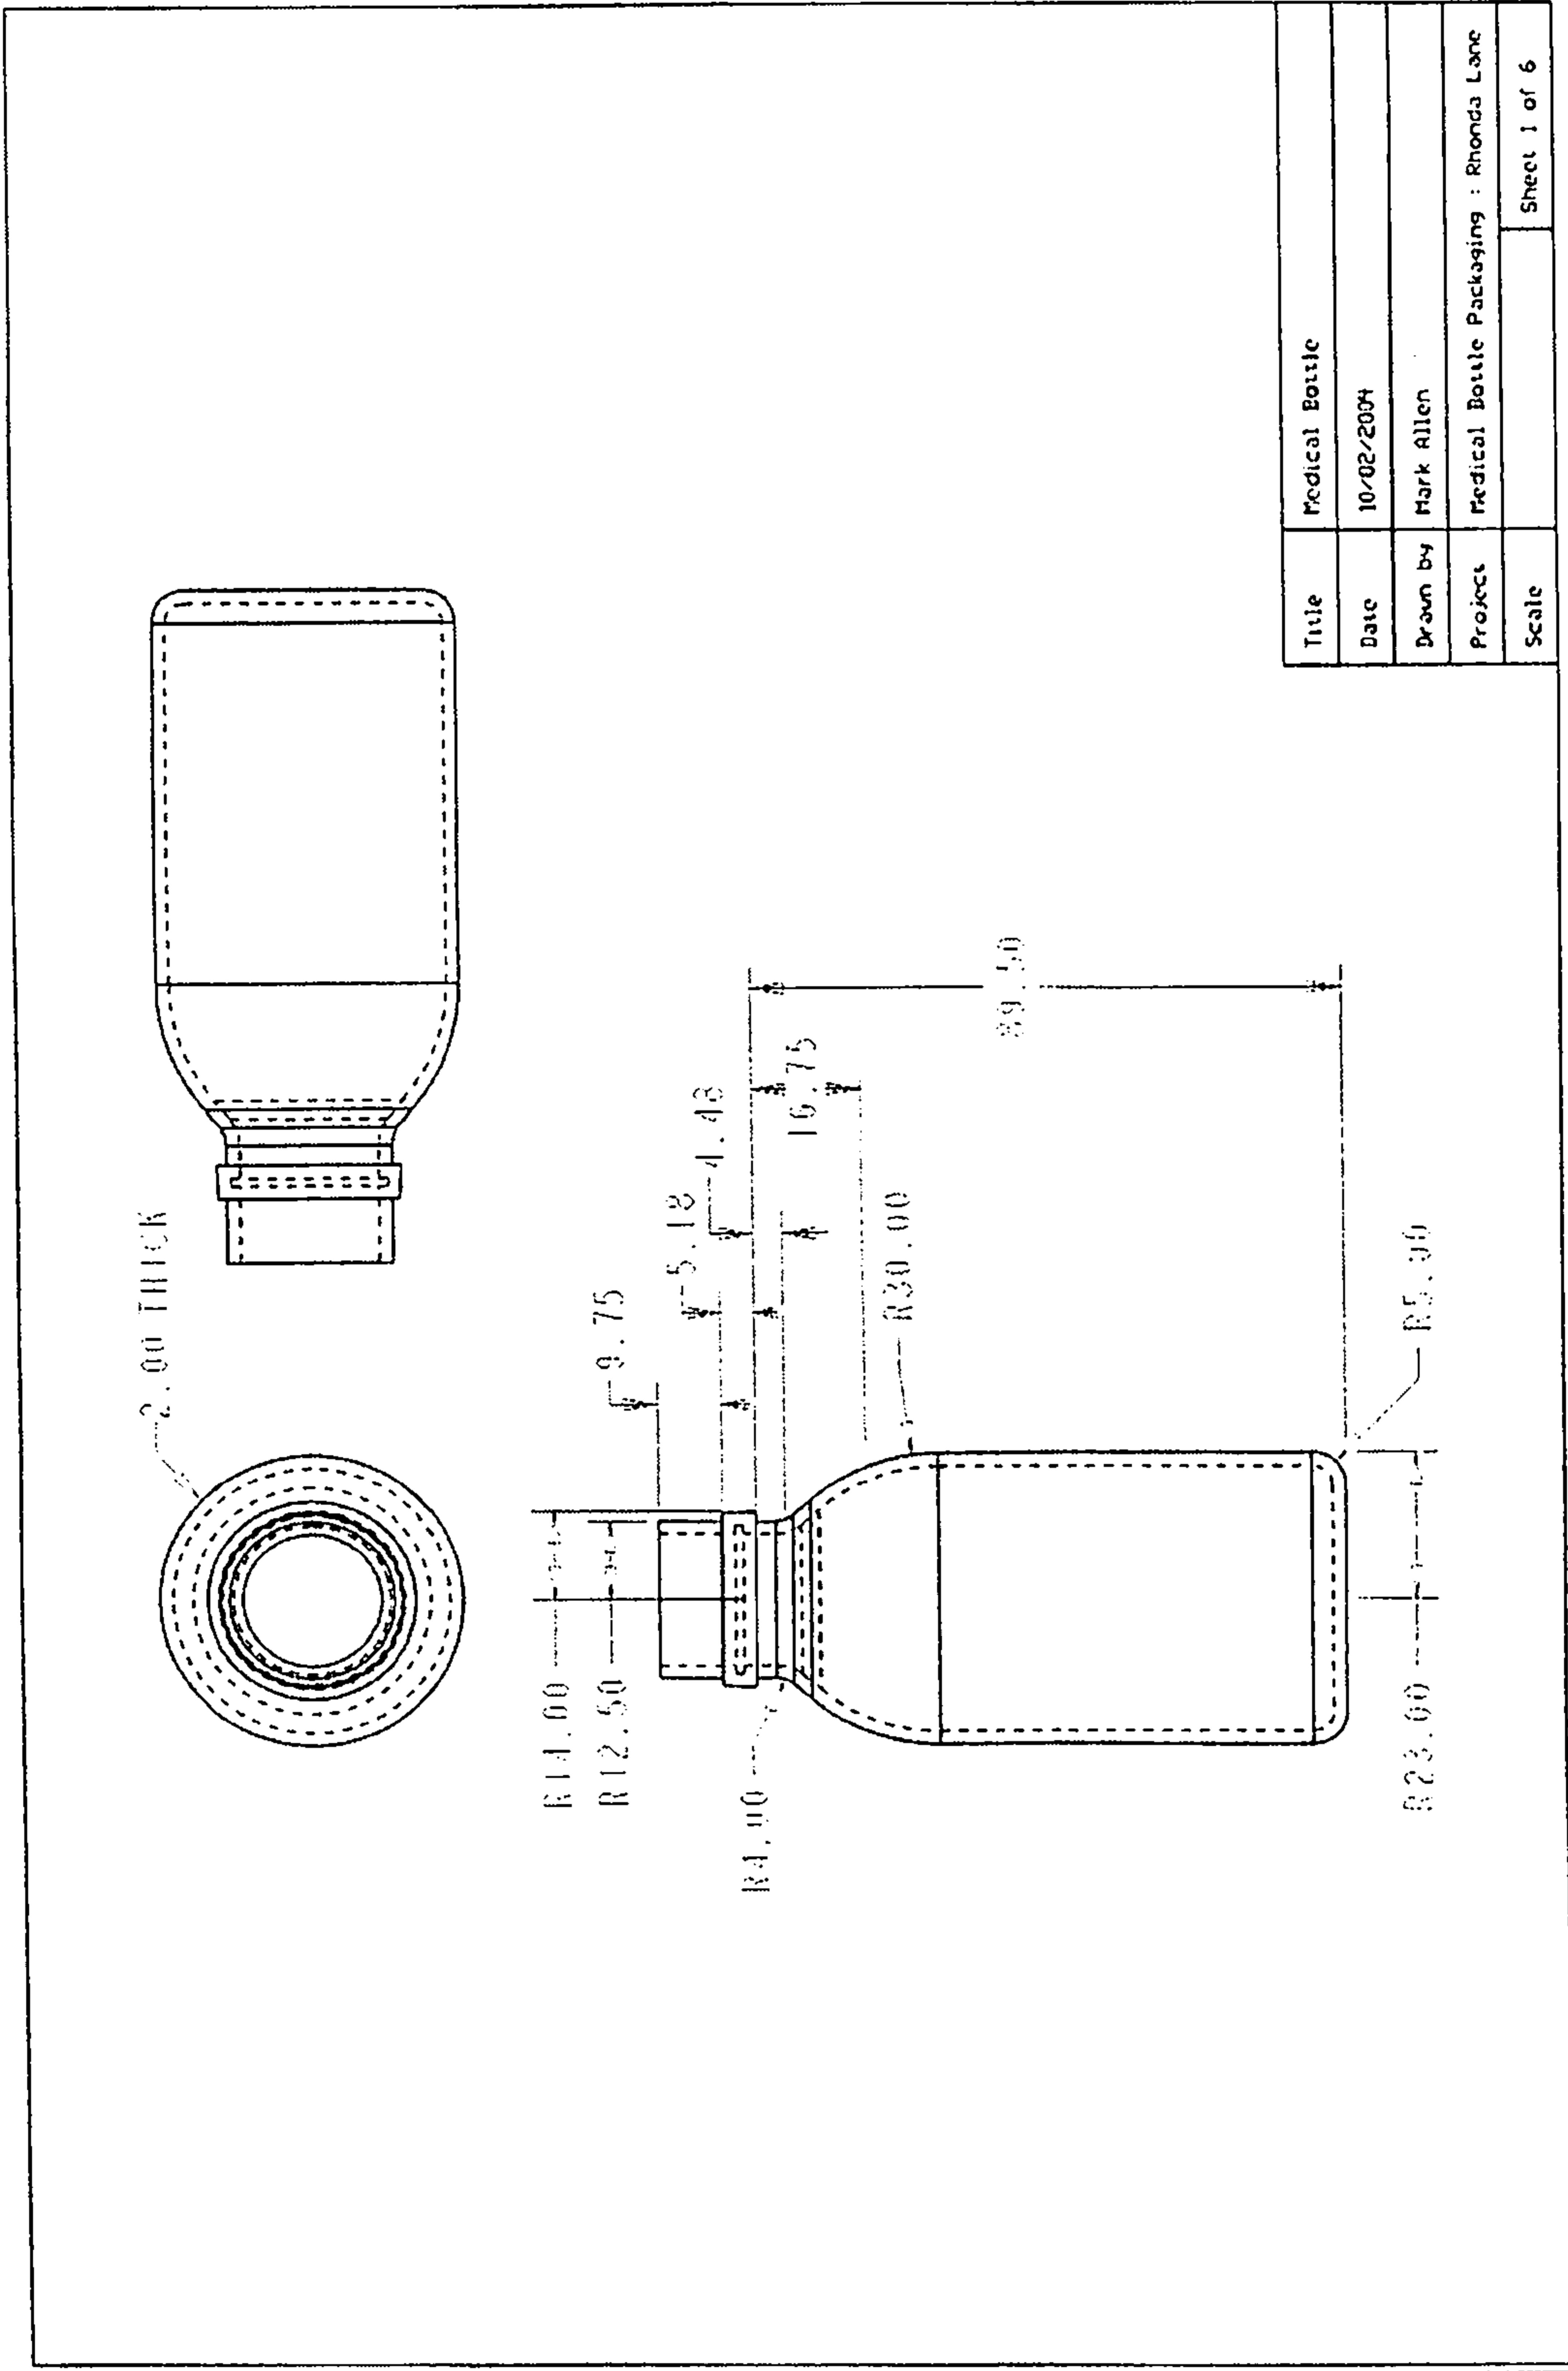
Pro- Engineer drawing of a standard 100ml glass medicine bottle
